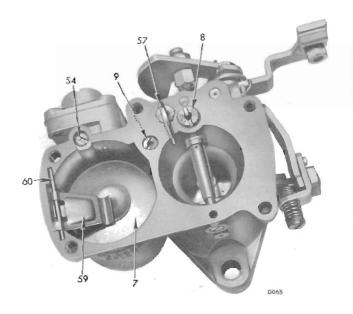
B30 PSE1 carburettor, showing the top cover removed
